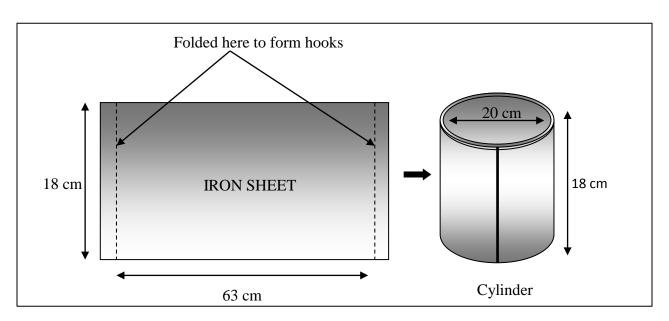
Dimensions of the iron sheet for making the pressure reduction chamber.
